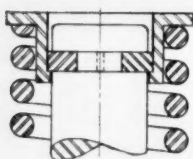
In this design, the socket is bored out to receive the centering rod which extends thru the spring but is smaller than the inside diameter.
